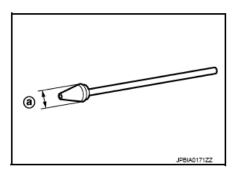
Identifying Adapter Picking Up End Dimension Courtesy of NISSAN MOTOR CO., U.S.A.
